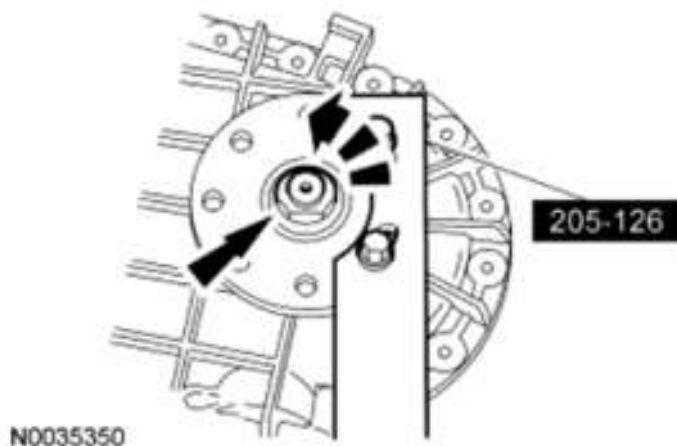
Removing Front Driveshaft Flange Nut Using Drive Pinion Flange Holding Fixture
